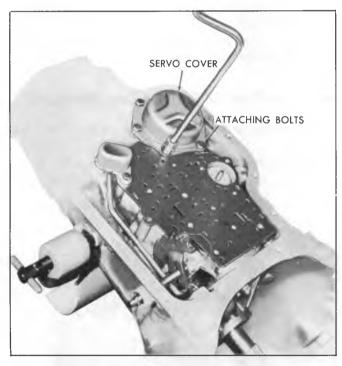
T--Removing Rear Servo Cover Attaching Bolts
